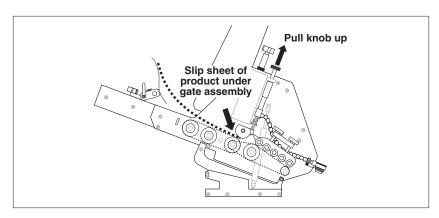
Lifting Gate Assembly Upward to Insert Product
